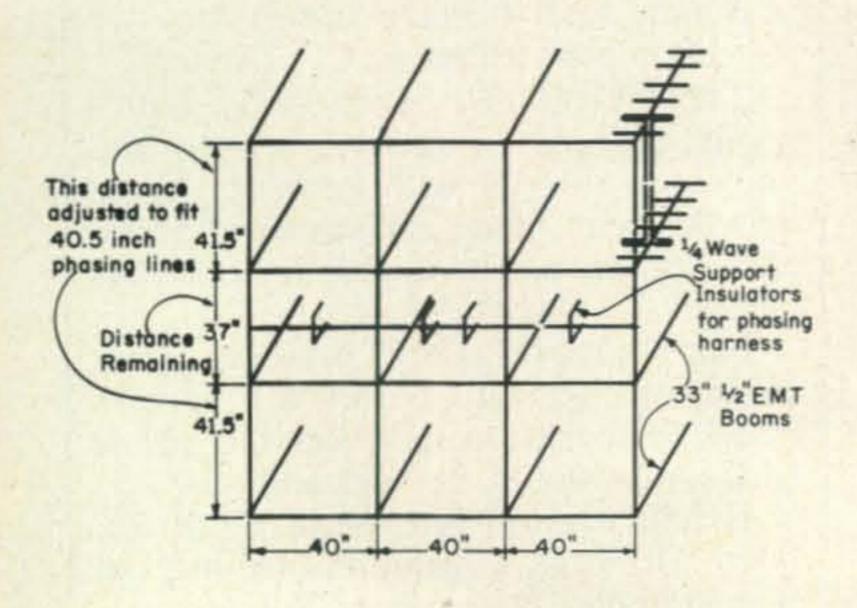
Frame of K2CBA's 96 element array consisting of 9 10' pieces of 1/2" EMT conduit.
